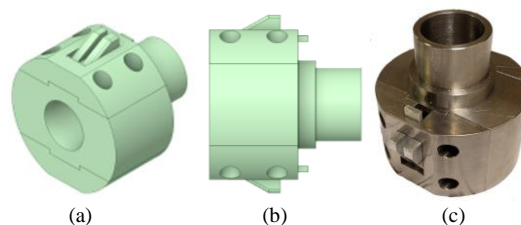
Latch geometry: (a) isometric view, (b) right side view, (c) manufactured latch.
